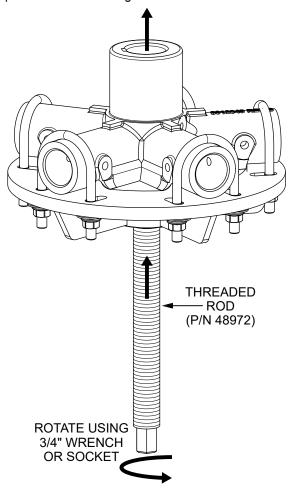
Rotate Threaded Rod To Remove Spider Assembly
